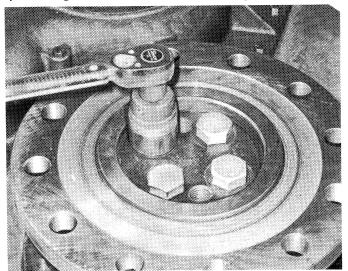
Removing or Installing Output Flange Retaining Screws.
